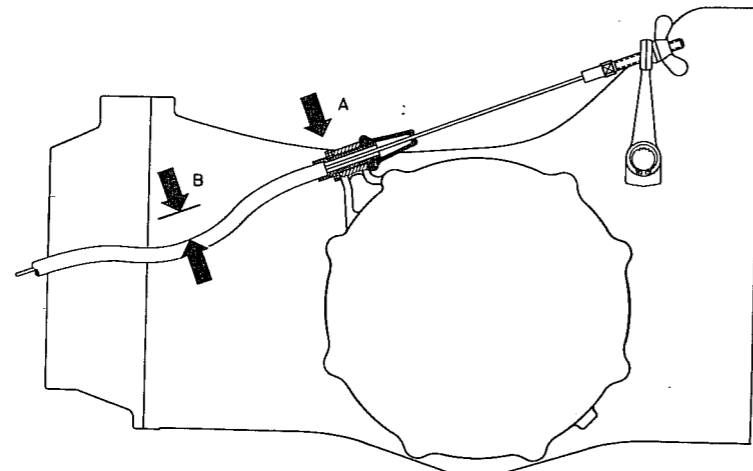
Insert shims at "A" to obtain the required clutch cable sag at "B"
